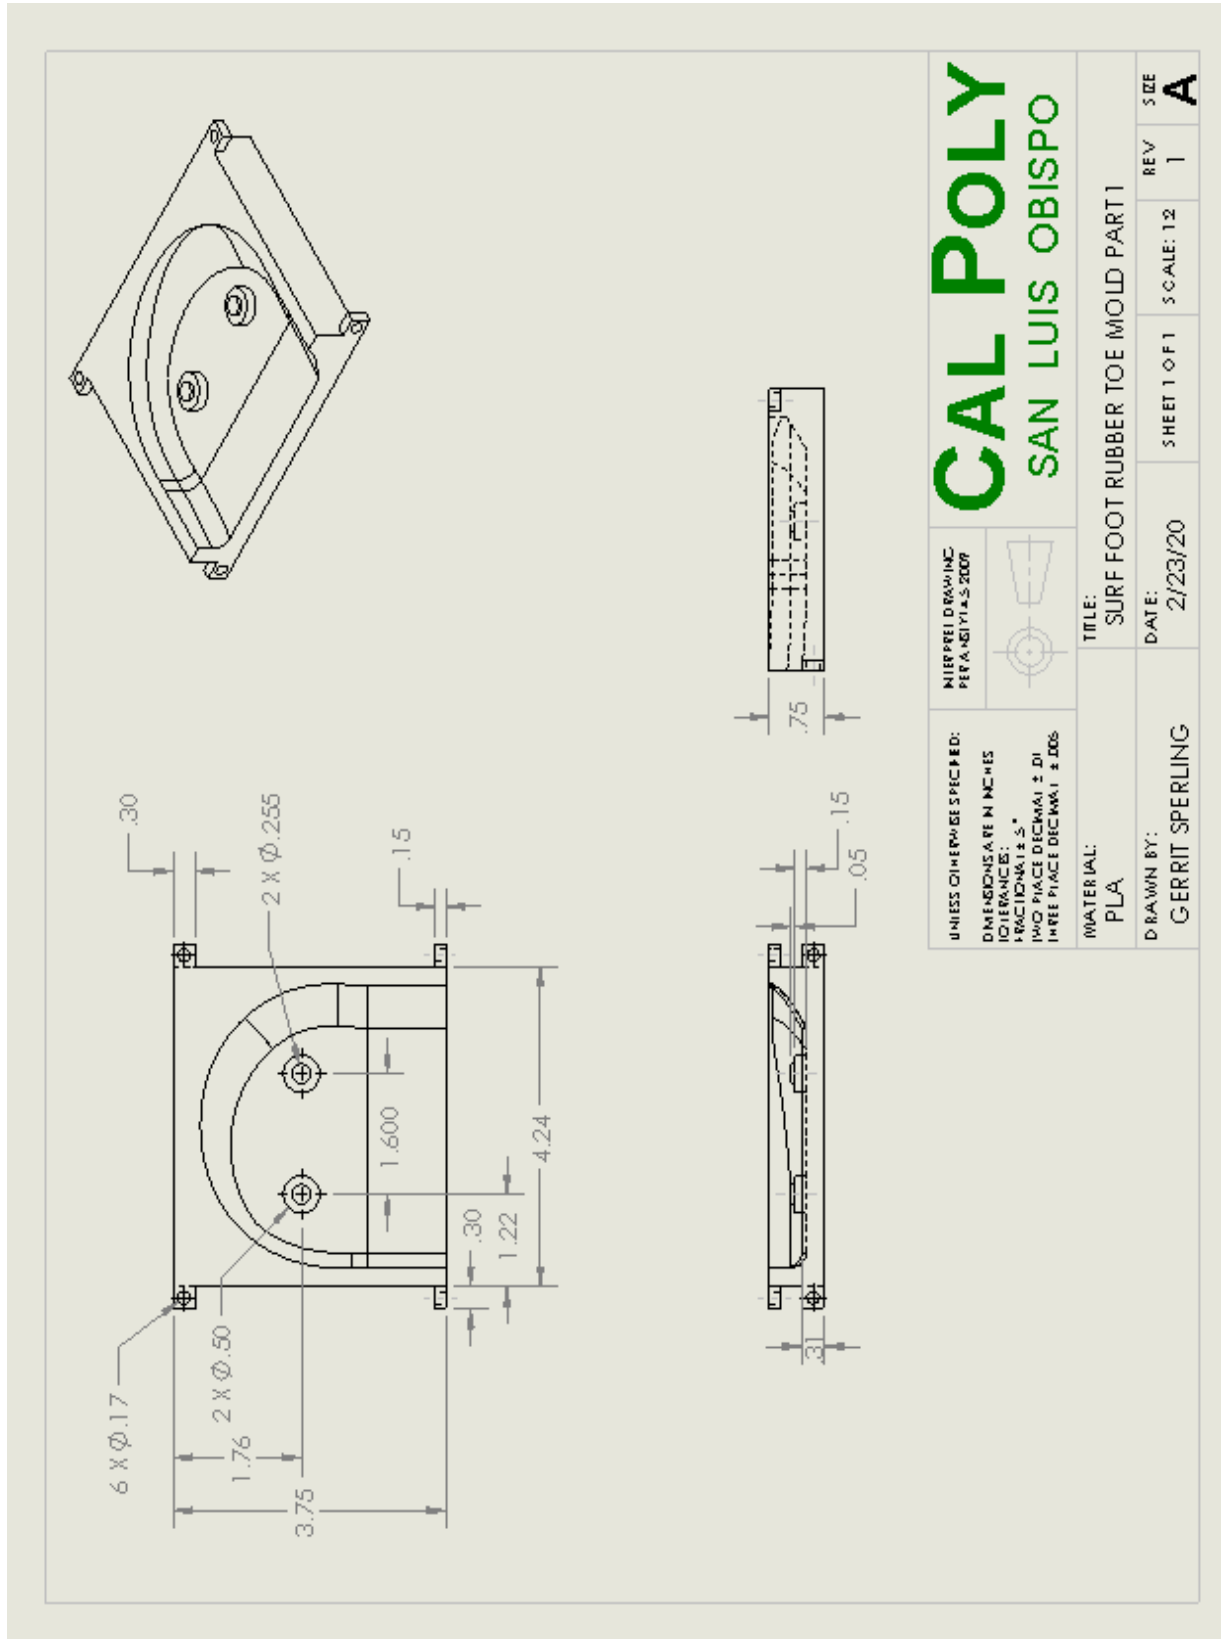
Detailed Drawing of Bottom Outer Mold for Rubber Toe
